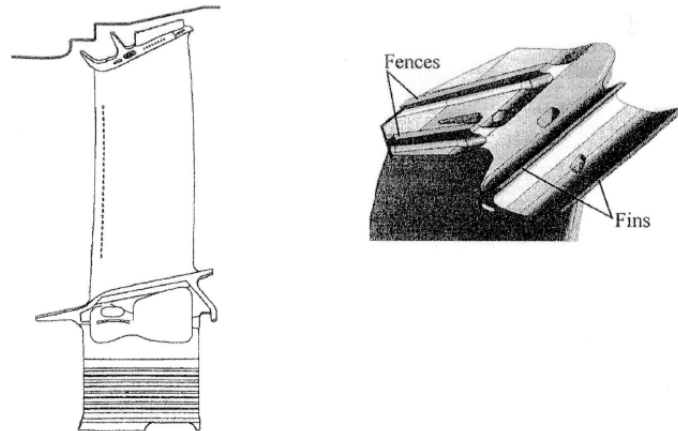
Sketch of high pressure shrouded turbine rotor seal [8]
